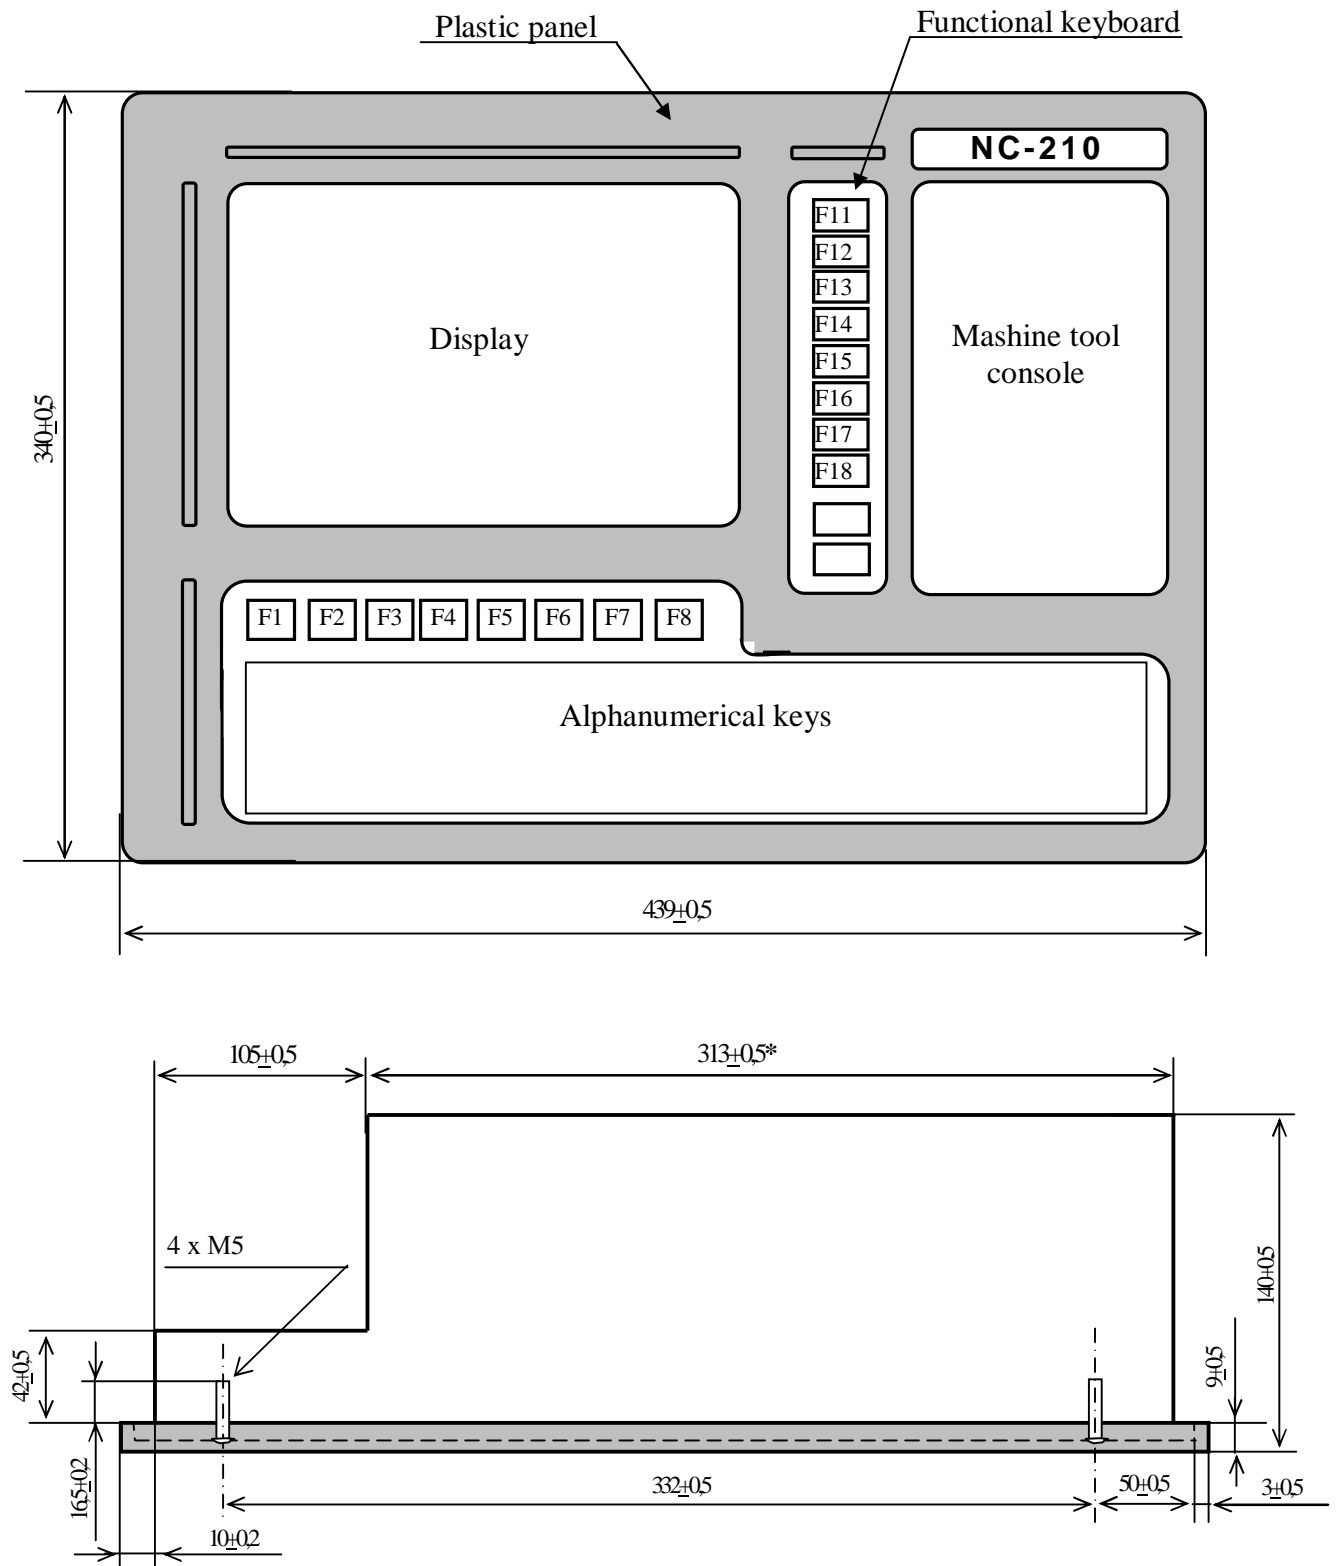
Basic dimensions of the NC-210 CNC Unit
